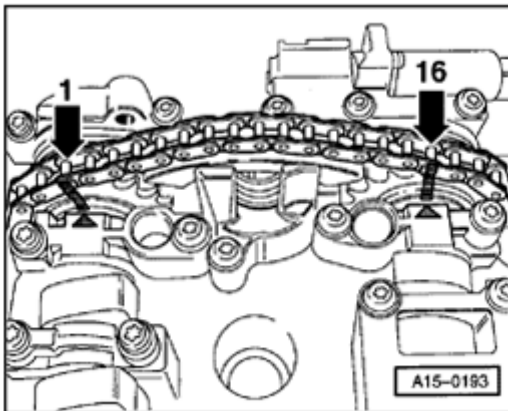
Checking Distance Between Markings Consists Of 16 Rollers Of The Drive Chain
